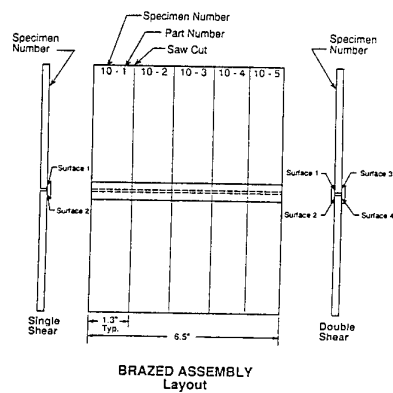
Illustration of Braze Assembly Used for Shear Test Specimens.
